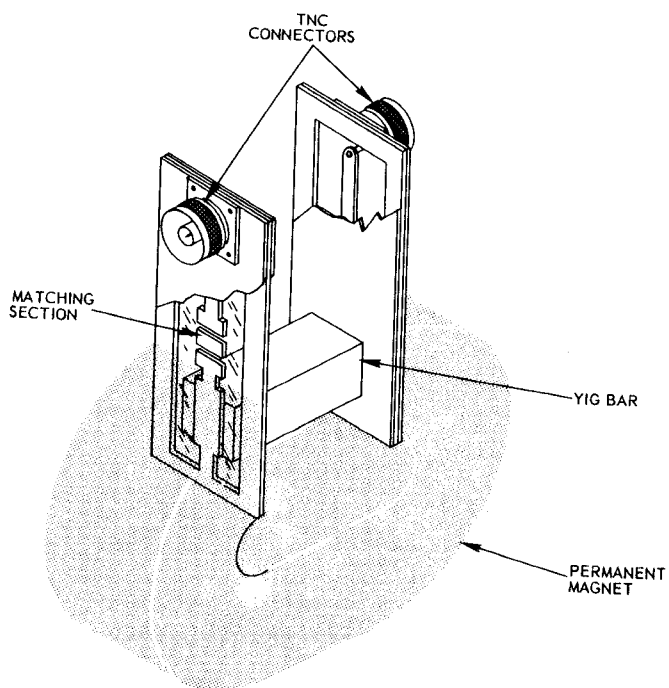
Prototype design of permanent magnet yttrium iron garnet delay line.
